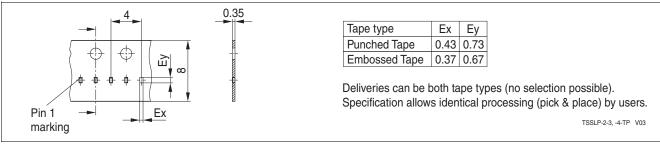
TSSLP-2-3 Packing (dimension in mm)
